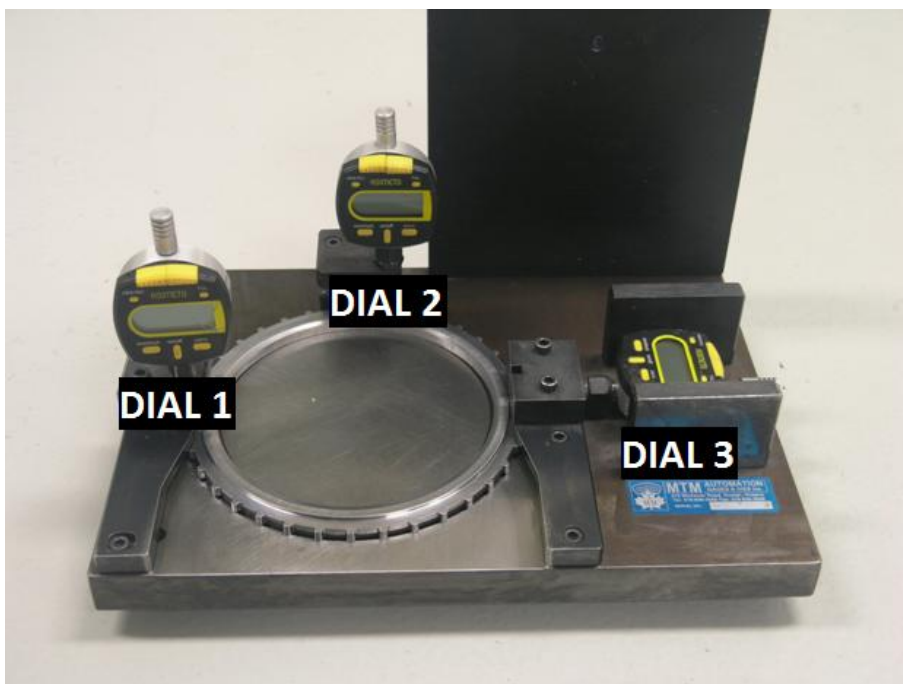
Gauge used for measuring synchronizing ring parts; dials 1 and 2 measure height and dial 3 measures diameter
